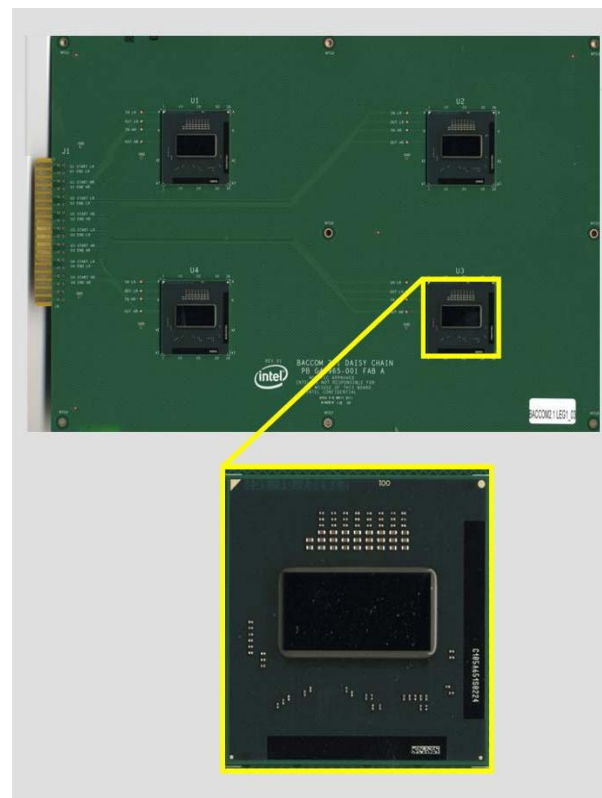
Top views of the populated printed circuit board and the BGA Package Test Vehicle.
